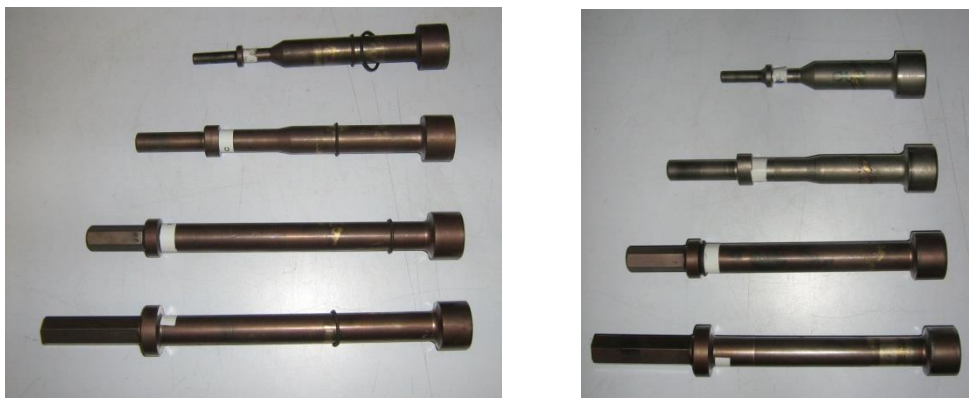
Examples of test bits for the new dynaload (left) and those for the old dynaload (right)
